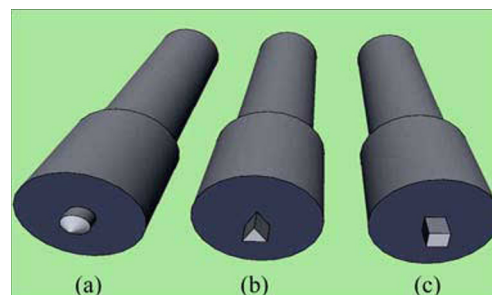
Tool pin geometries: (a) Threaded tapered cylindrical pin T_1 , (b) Triangular pin T_2 ; (c) Square pin T_3
